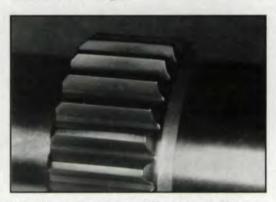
Spline end of 9310 multi-metal demonstration sun gear.
